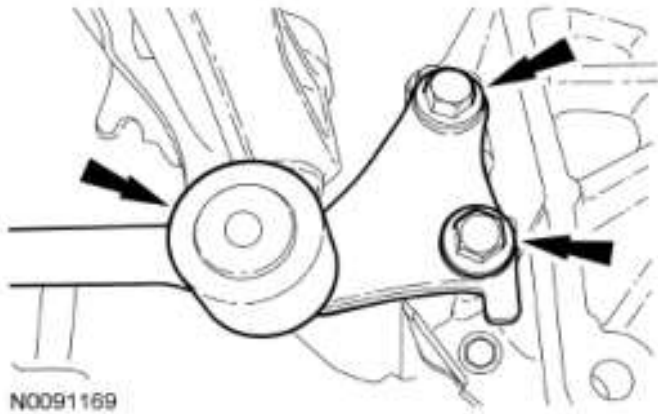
Locating Roll Restrictor, Bolts And Bracket
